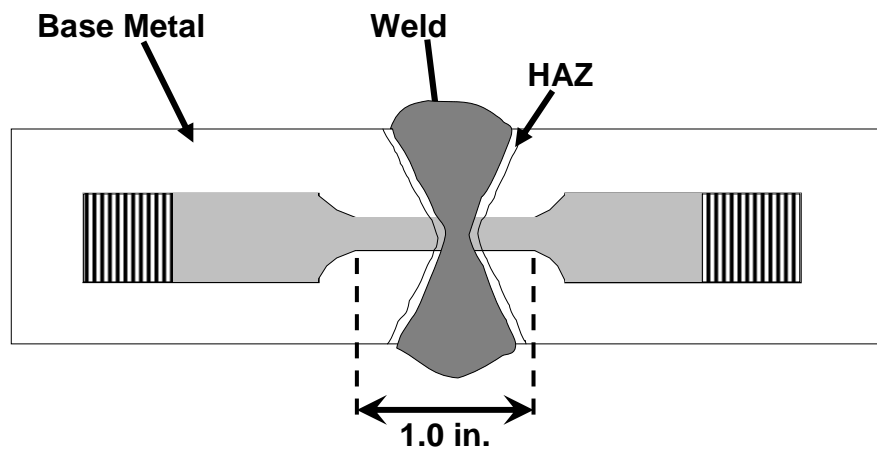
Schematic showing welded DSS bar and tensile specimens made out of the welded bar
